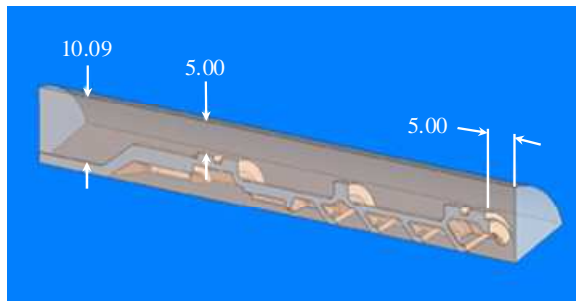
Longitudinal slice of cylindrical ceramic mold (dimensions in mm).
